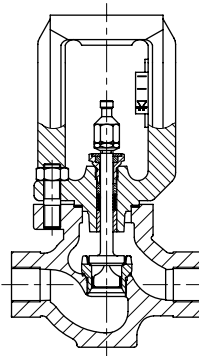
· Type 241 Globe Valve, sizes $\frac{1}{2}$ " to 2" with NPT thread
